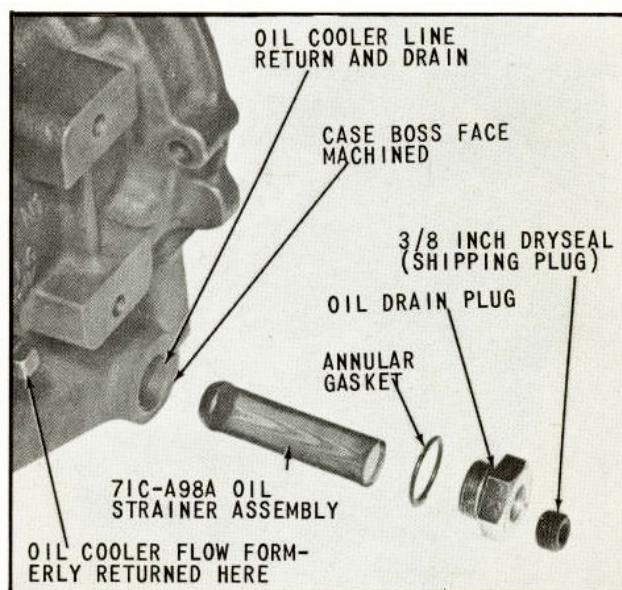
Installation of Oil Strainer Assembly and Cooler Line Return Bushing
